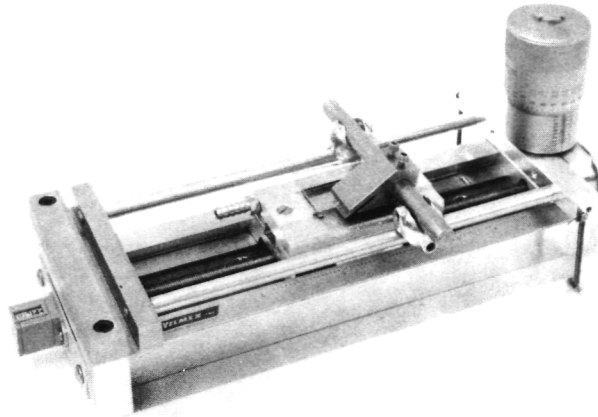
Delidding Tool With Adhesive-Removal-Knife Attachment
